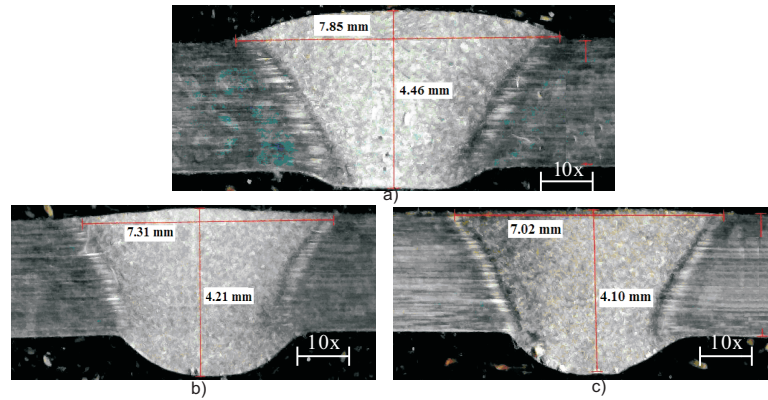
a) Weld bead profile for AA7075 weldments at the speed of 120 mm/min, b) Weld bead profile for AA7075 weldments at the speed of 130 mm/min, c) Weld bead profile for AA7075 weldments at the speed of 140 mm/min
